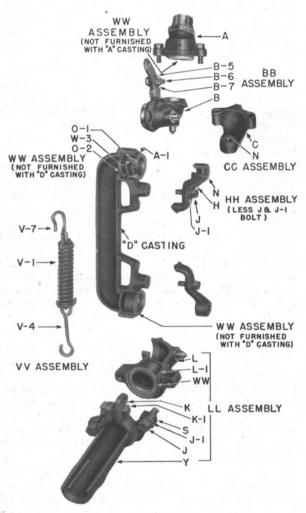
Exploded View of No. 1136 Flexible Metallic Conduit Castings
